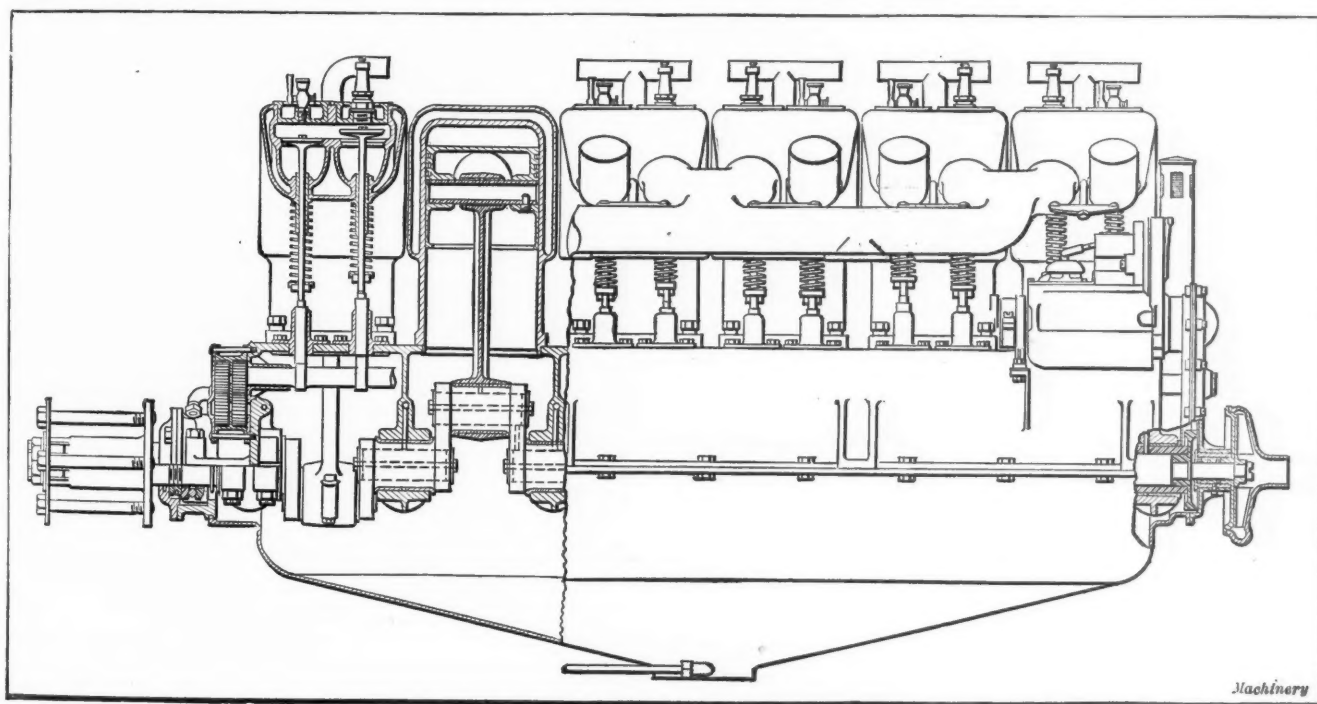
Construction of Sturtevant Motor, Six-cylinder
